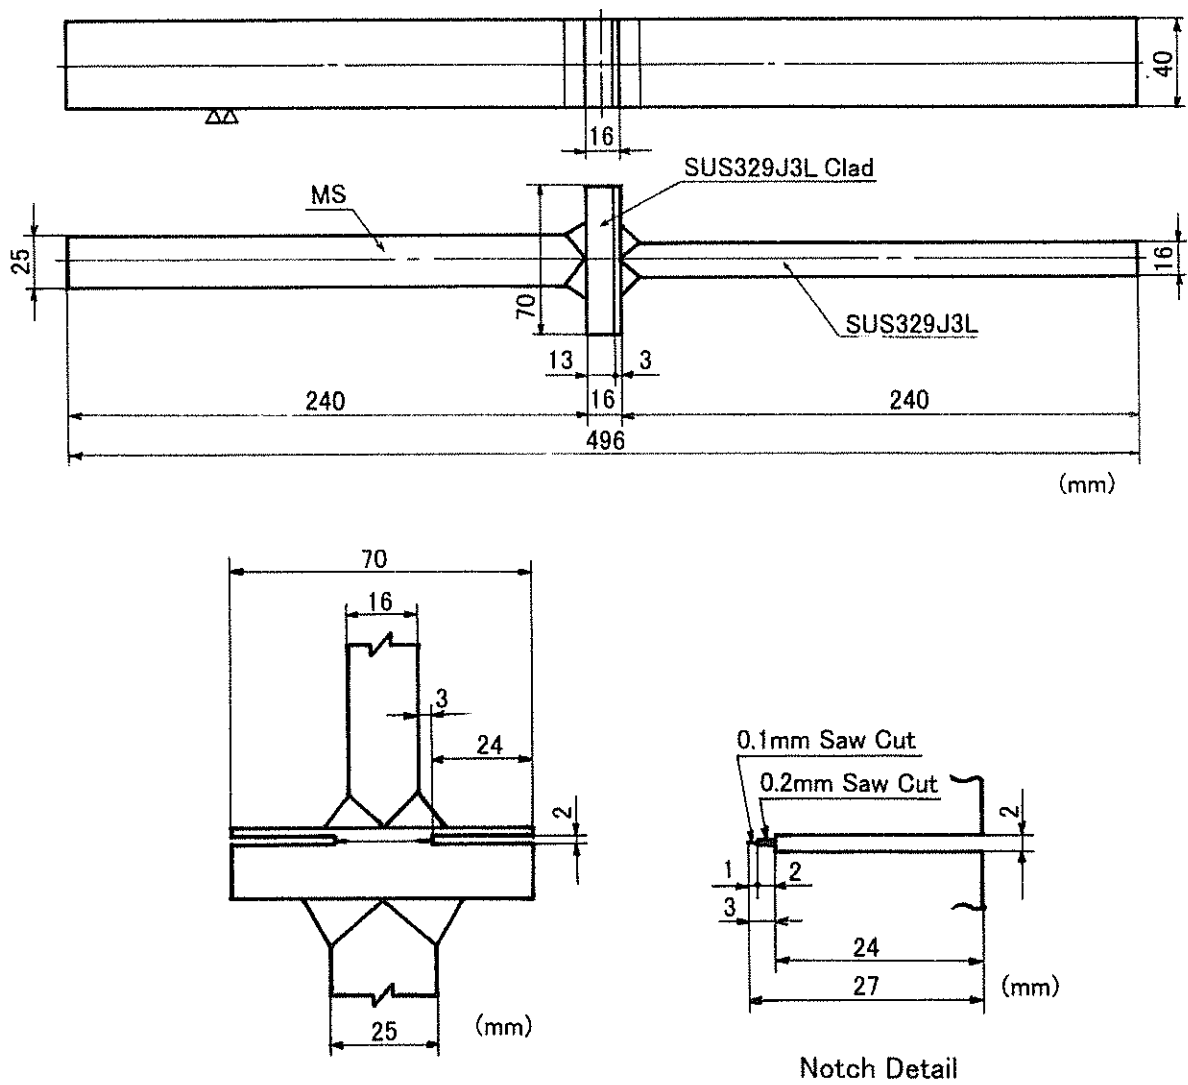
Shape and size of cruciform welded joint specimen for tensile fracture toughness test
